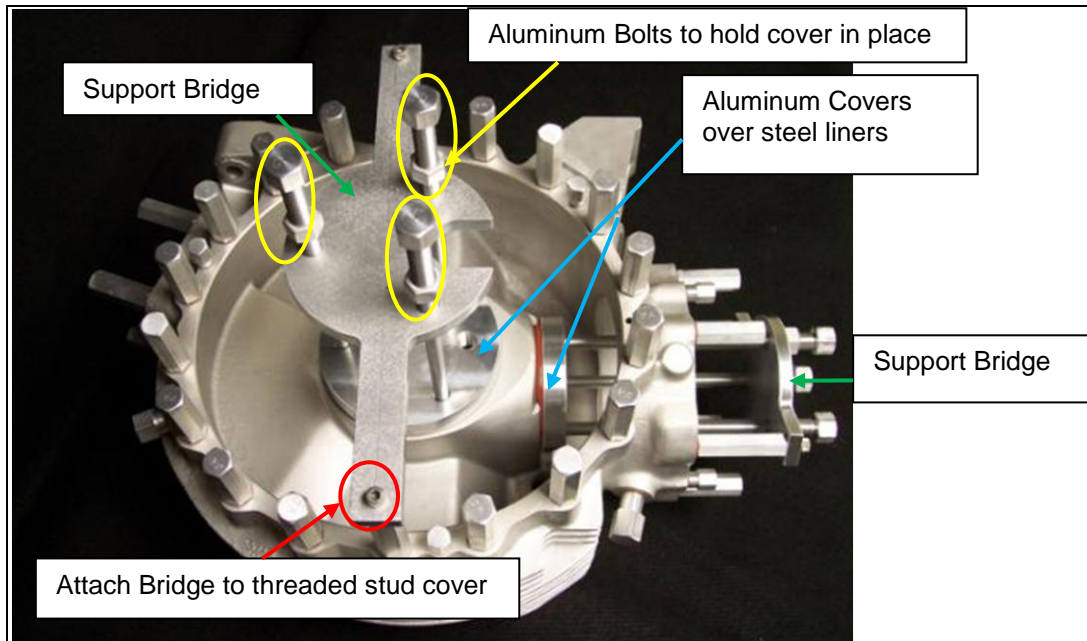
Masking of steel liners on H-64 tail rotor gearbox housing.
